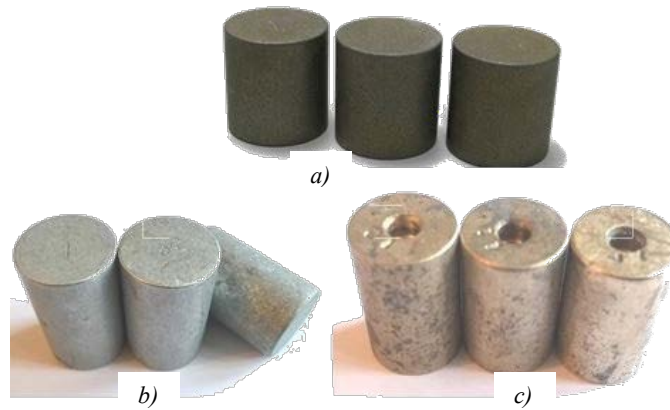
Samples for determining metal removal from the workpiece surface:
